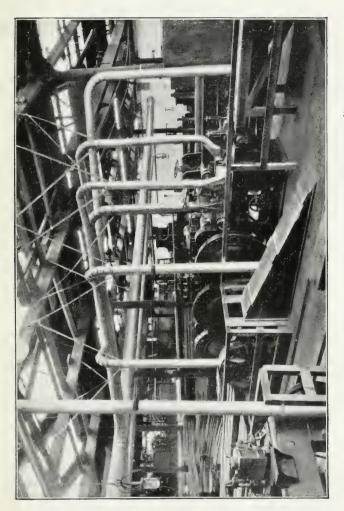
SAWMIL WITH SAWDUST AND REFUSE COLLECTING PLANT. [*thy courtesy of Similerant Engineering Co., Lid.*]
